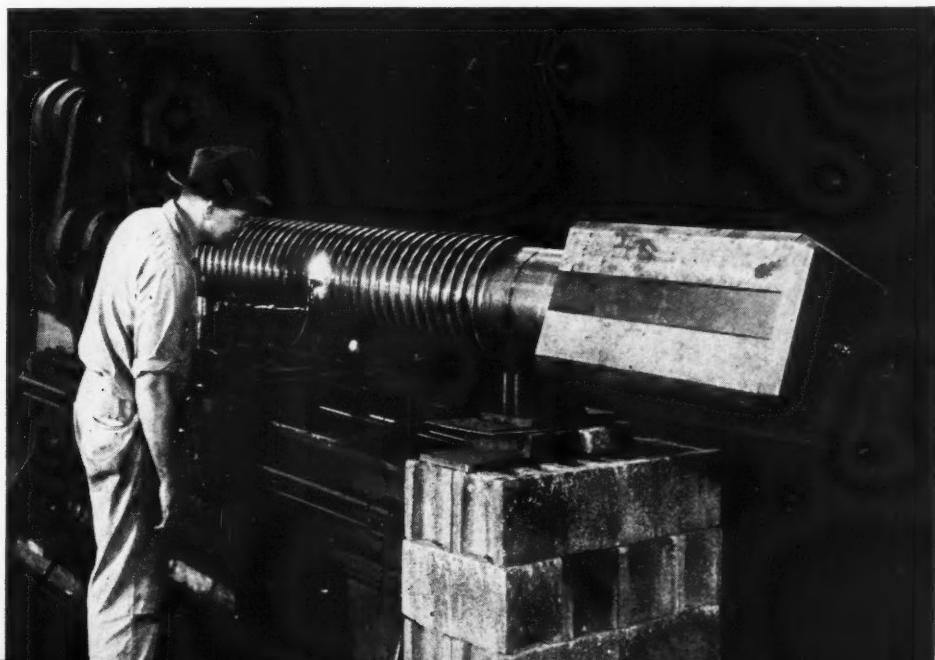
Threaded portion of a rolling mill hold-down screw is selectively hardened in this set up. One end of the screw is held in the chuck of a lathe, and the blowpipe is mounted on the carriage
